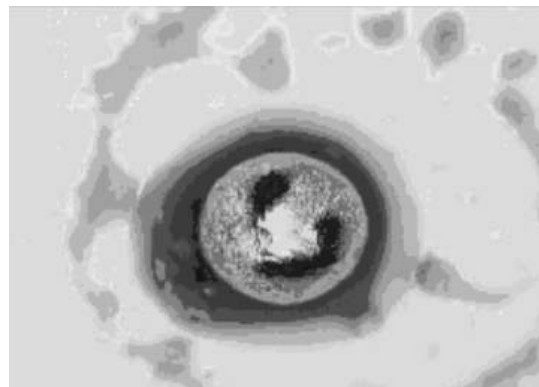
Example of nonwetting shown by the exposed copper pads
